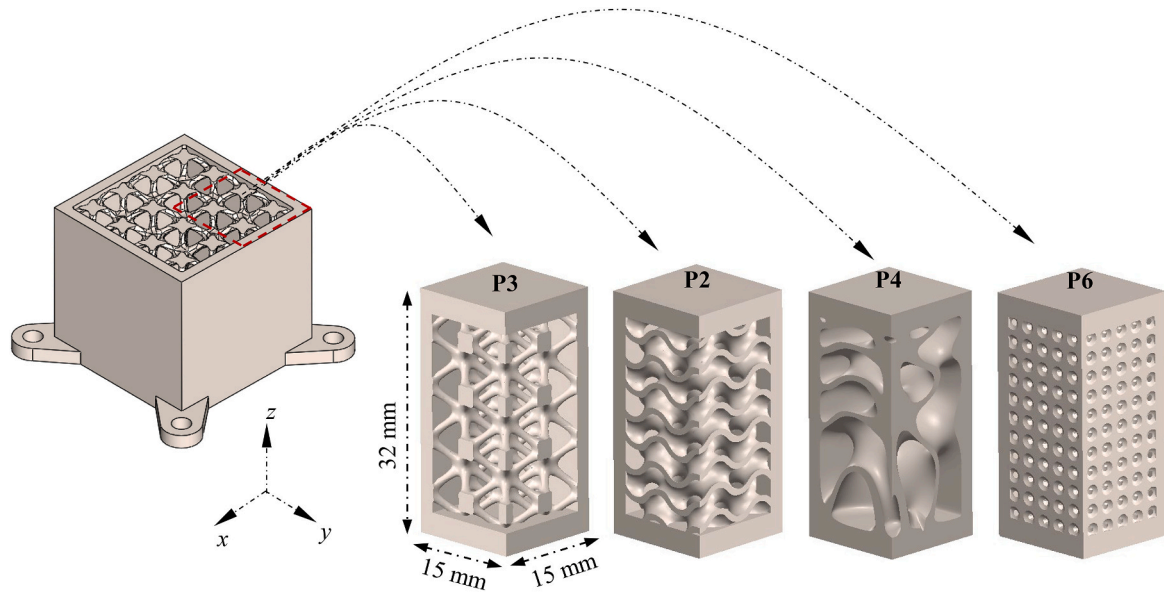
CAD models of heat sink geometries, dimensions – all in mm.
